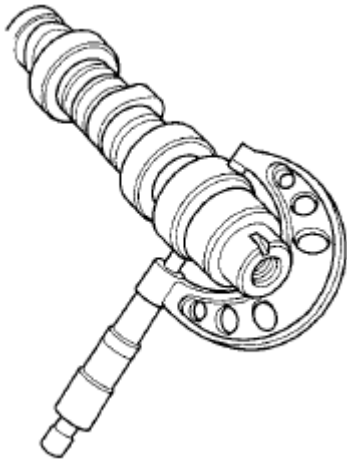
Measuring Diameter Of Each Camshaft Journal
